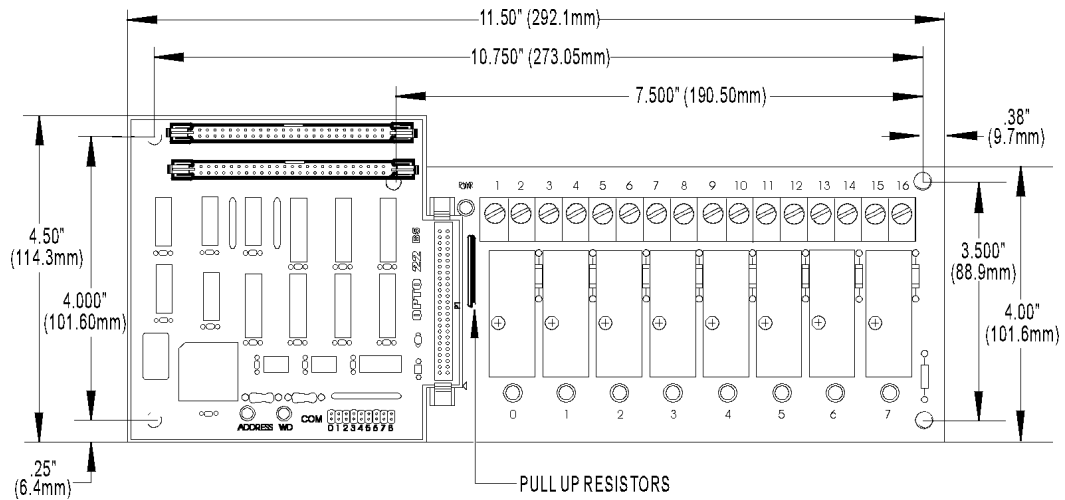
Mounting Dimensions of the PB8H with a B5 Installed
